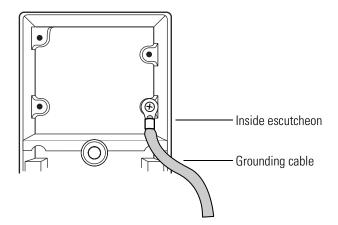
Connecting the grounding cable for Keypad EZ Locks
